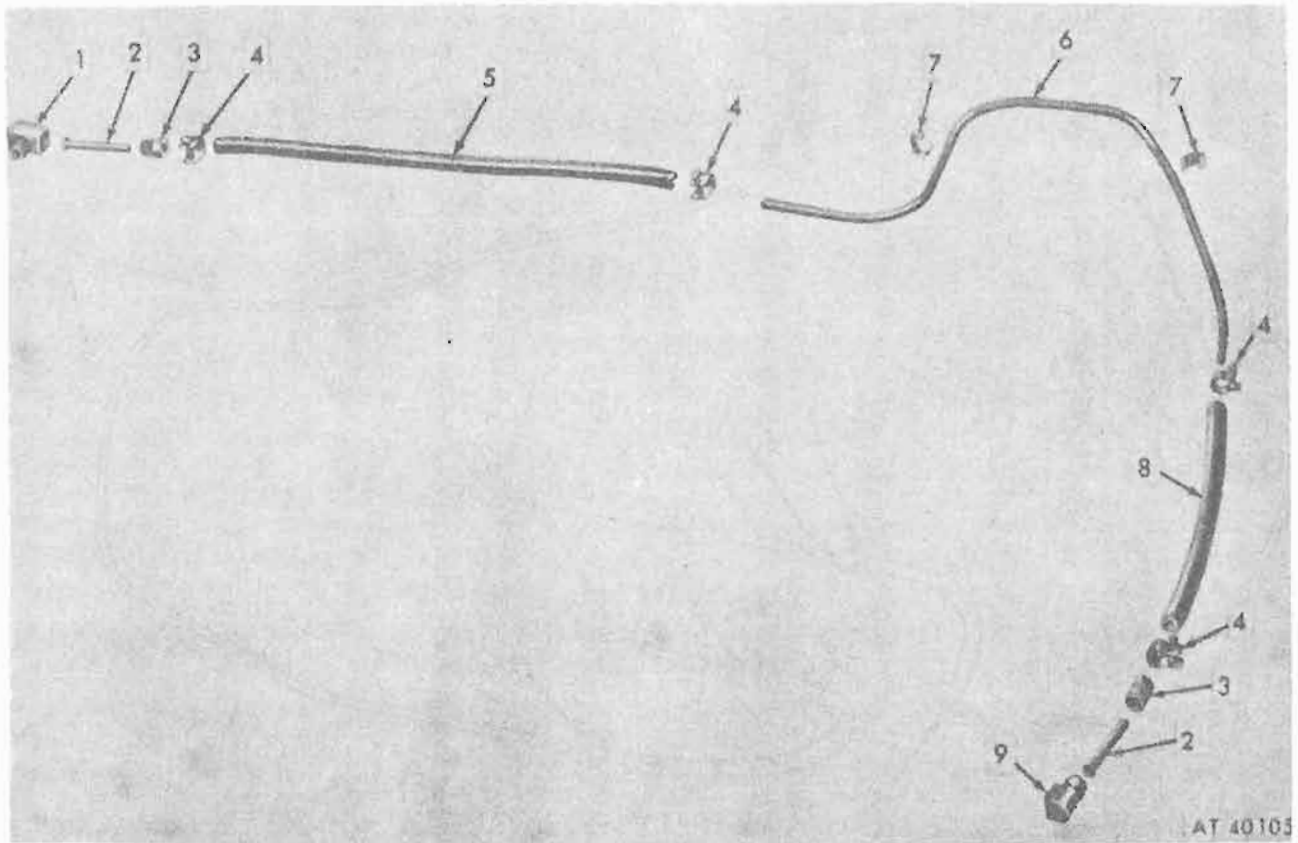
Distributor ventilation system, vacuum pump tube, and related parts—exploded view (M151, M151A1, M151A1C, and M718 vehicles).
